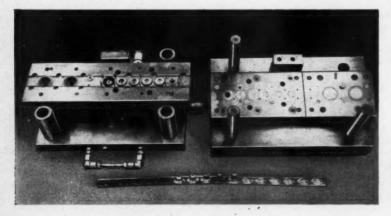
A view showing the punch and die members of a multi-stage tool for the production of inner cases for cylindrical cells
